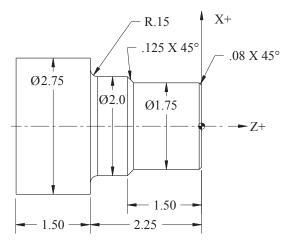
CNC Turning Center Programming Error Diagnosis Part Drawing
